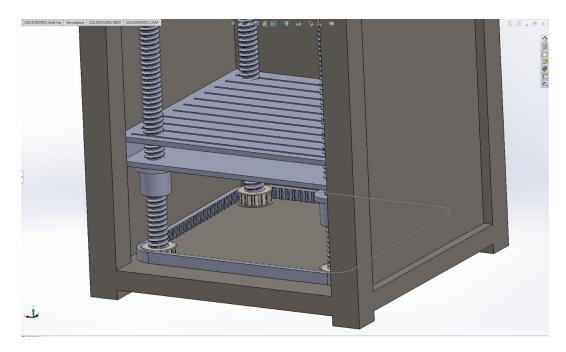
Rough CAD drawing of belt mechanism to power motion in the z direction.
